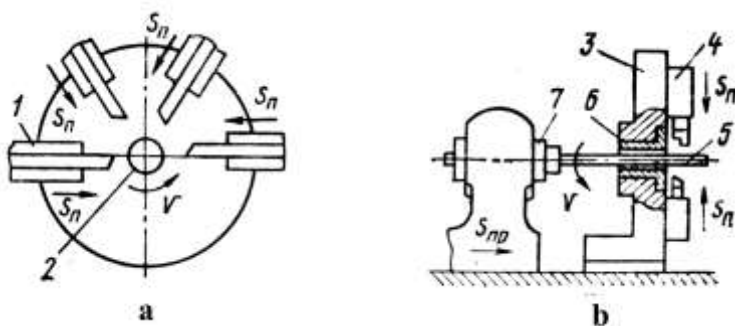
Machining in single-spindle automatic lathes: a – cutting off, b – longitudinal turning
